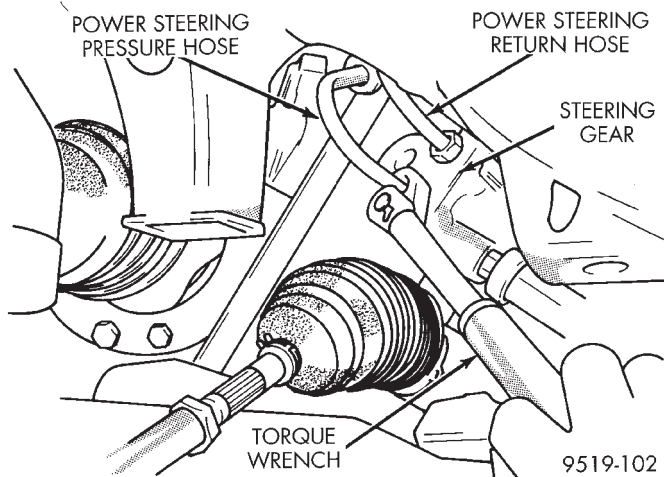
Torquing Power Steering Fluid Hose Tube Nuts
